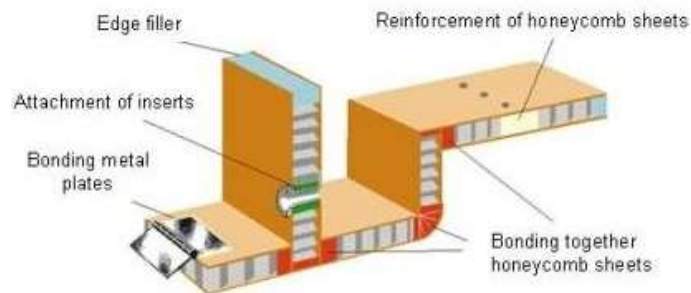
Lightweight structure example produced using honeycomb sheets and adhesives [15]
